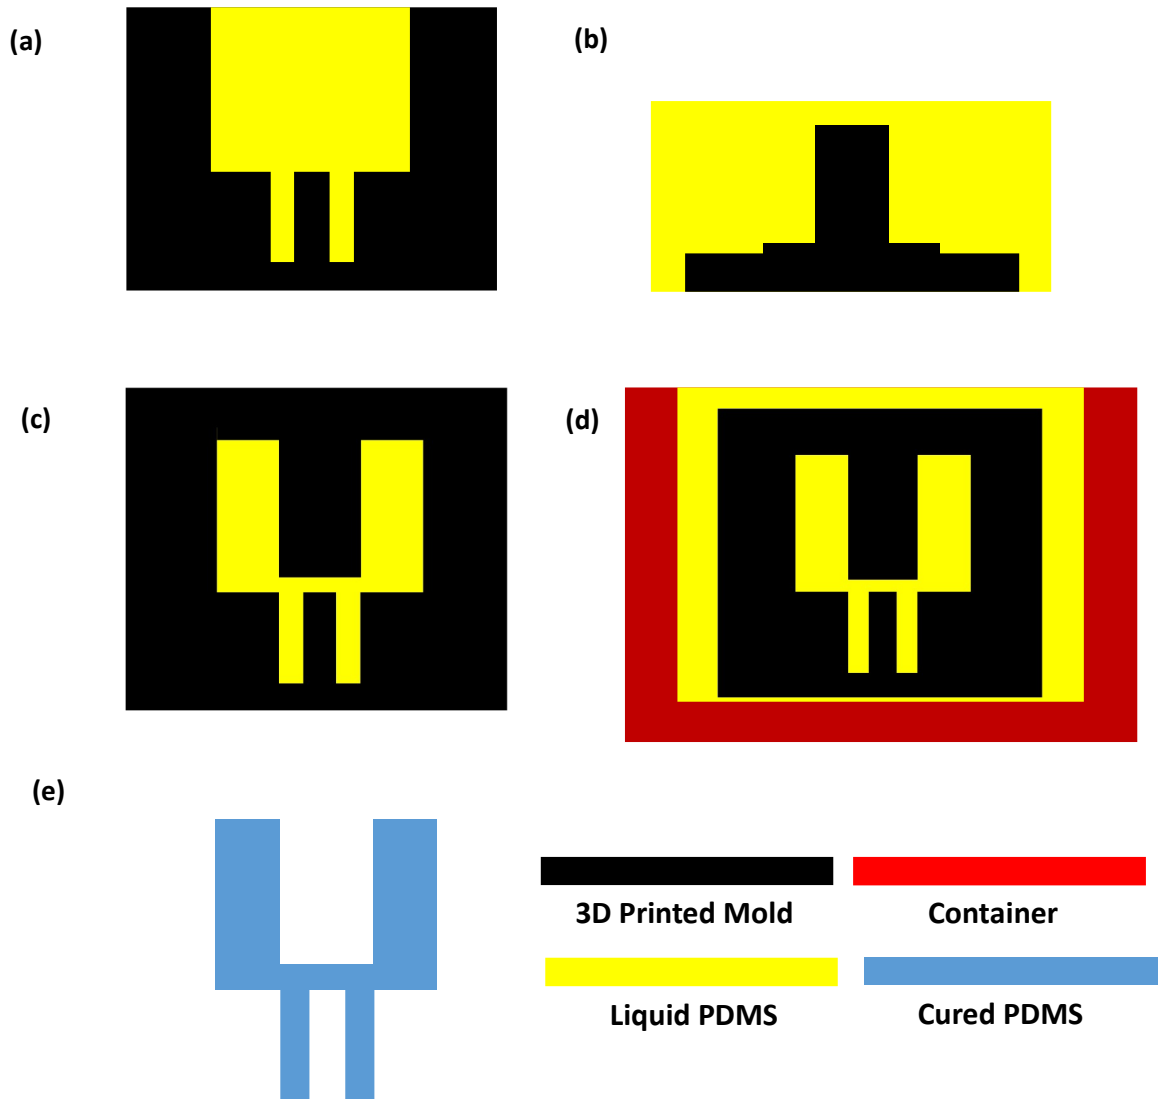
Microhand Fabrication Steps. (a,b) The 3D printed mold was filled with liquid and debubbled PDMS, and the mold cap was covered with the same PDMS. (c) Closing the mold and the mold cap. The liquid and debubbled PDMS were encapsulated in the 3D printed parts. (d) Immerse the 3D printed parts into the liquid, debubbled PDMS. The whole container should be placed in the vacuum and debubbled again. The unwanted bubbles that were trapped in the mold during the process can be removed in this step. (e) PDMS was cured at 25°C in one week. The cured PDMS should be removed from the 3D printed molds. The functional part of the microhand device was formed.
